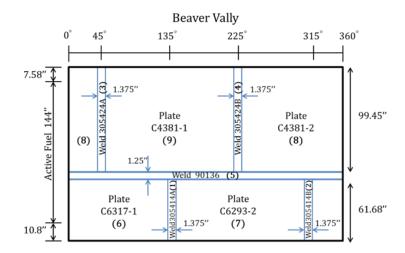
THE CONFIGURATION OF WELDS AND PLATES IN THE RPV BELTLINE REGION
